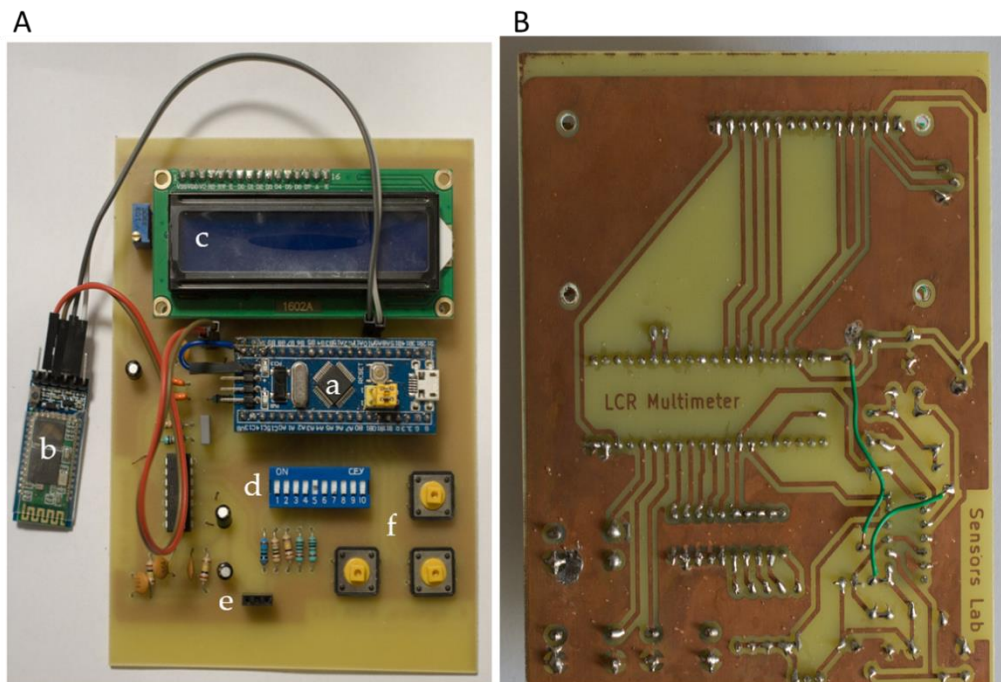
The prototype PCB; A) Front side of the board: (a) Blue Pill STM32 development board; (b) HC-05 BT module; (c) LCD screen; (d) DIP switches; (e) input pins; (f) settings buttons; B) Back side of the board.
